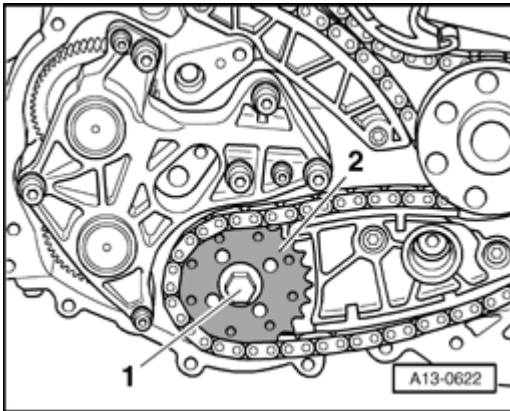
Loosening/Tightening Bolt On Drive Sprocket
